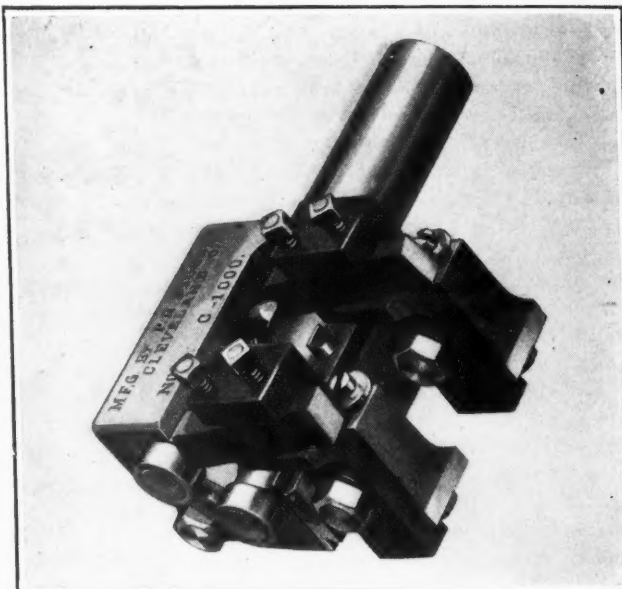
Tangent-cut Box-tool made by the P. H. Biggs Machine Co.
